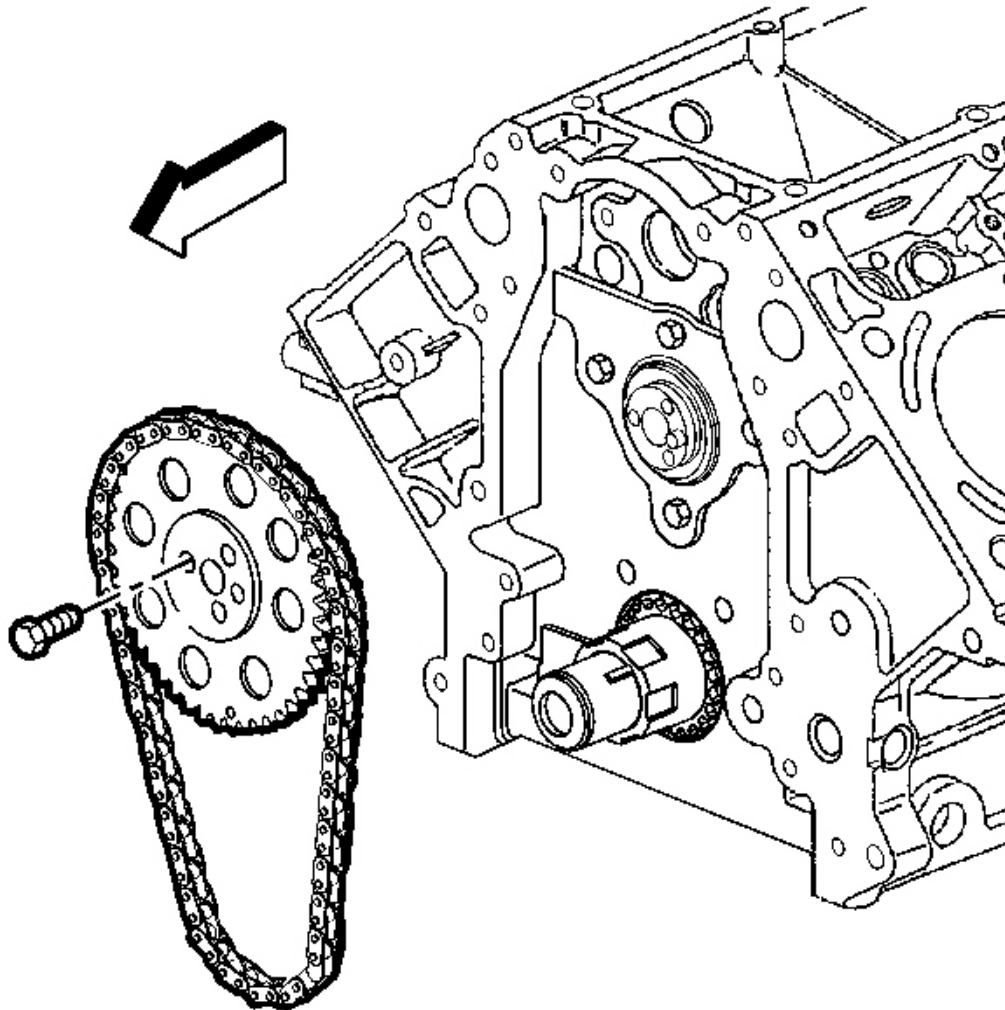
View Of Camshaft Sprocket, Bolt & Timing Chain
